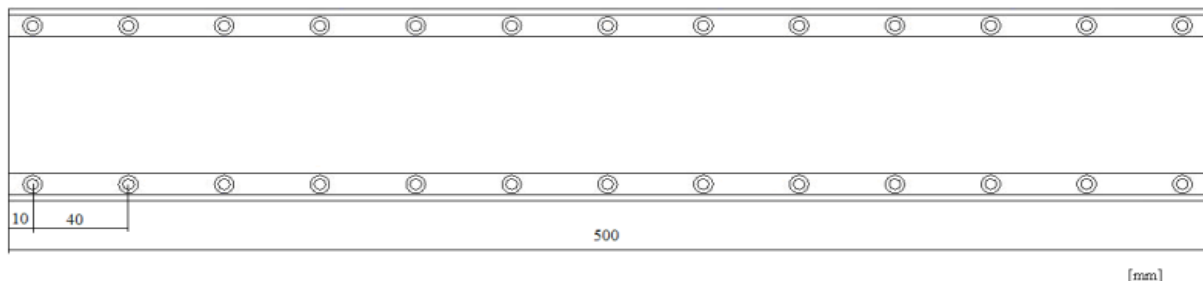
A weld bonded beam with 40 mm distance between the spot welds. The adhesive line is visible in this beam.
